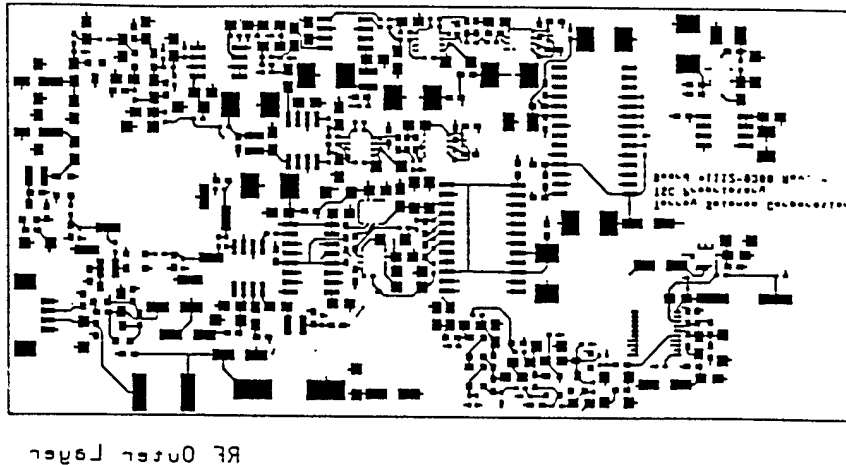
RF side top surface metallization including interconnects, solder pads, and bonding pads.
